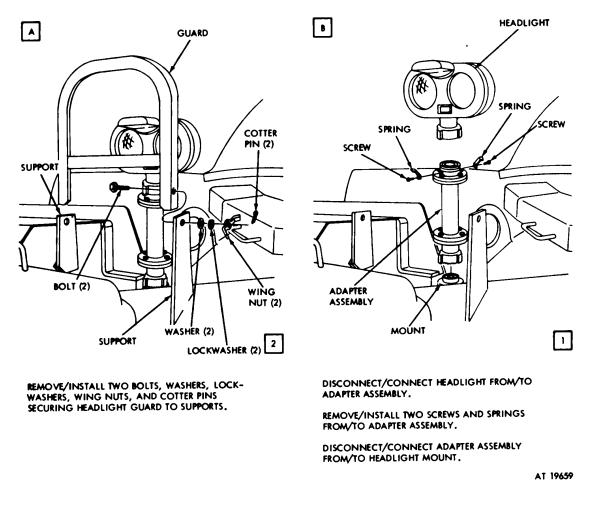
Removal or installation of brush guard and adapter assembly.
